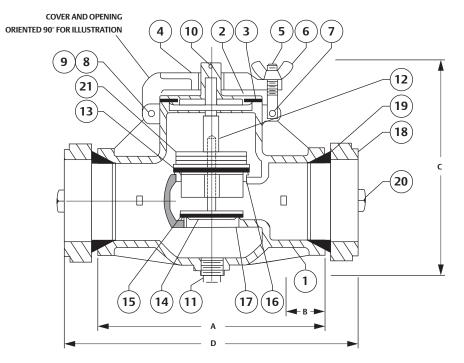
Enardo™ 800-SO In-Line Vent Valve Dimensions
